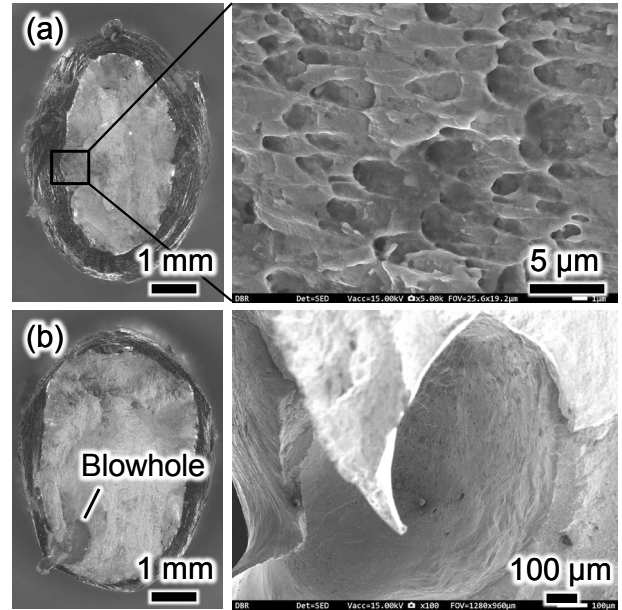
SEM images of fracture surfaces after tensile testing in Fig. 9 of (a) and (b).
